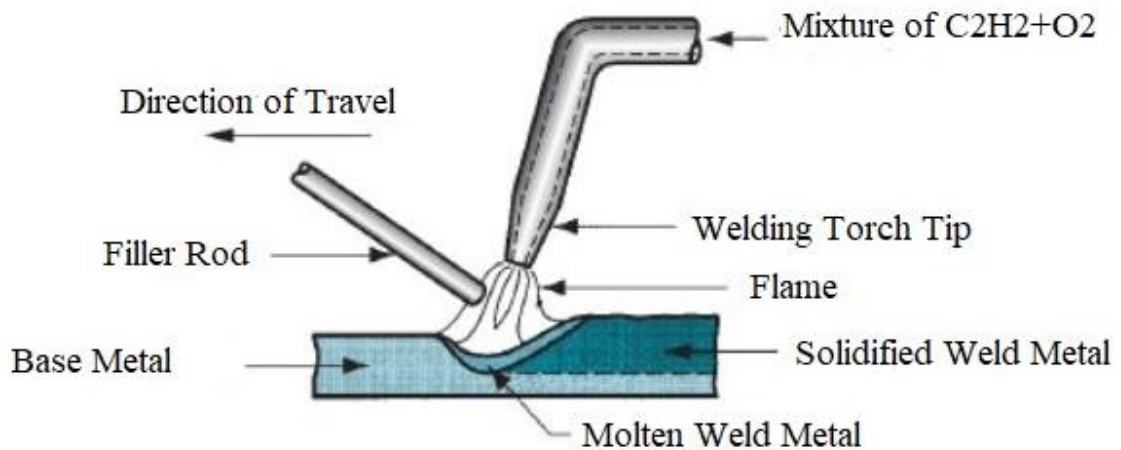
Welding of oxy-acetylene [38].
